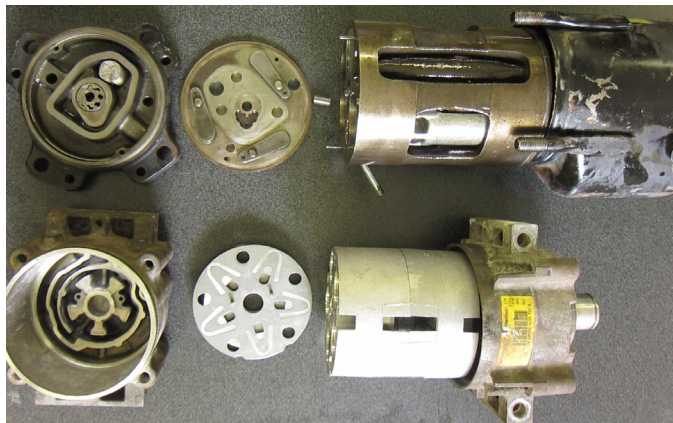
Old school Frigidaire A-6 compressor on top. That “bump” in the compressor body (far right) is the oil pan and the tube extending from the inner assembly is the oil pickup. You can see the oil pump gears in the rear head (far left). This compressor was noisy. You can see the oil pump drive is broken off the rear of the swash shaft. Below is a Ford FX10 compressor that is typical of most modern swash-plate units. No oil reservoir or oil pump. It is fully dependant on refrigerant to supply oil.
